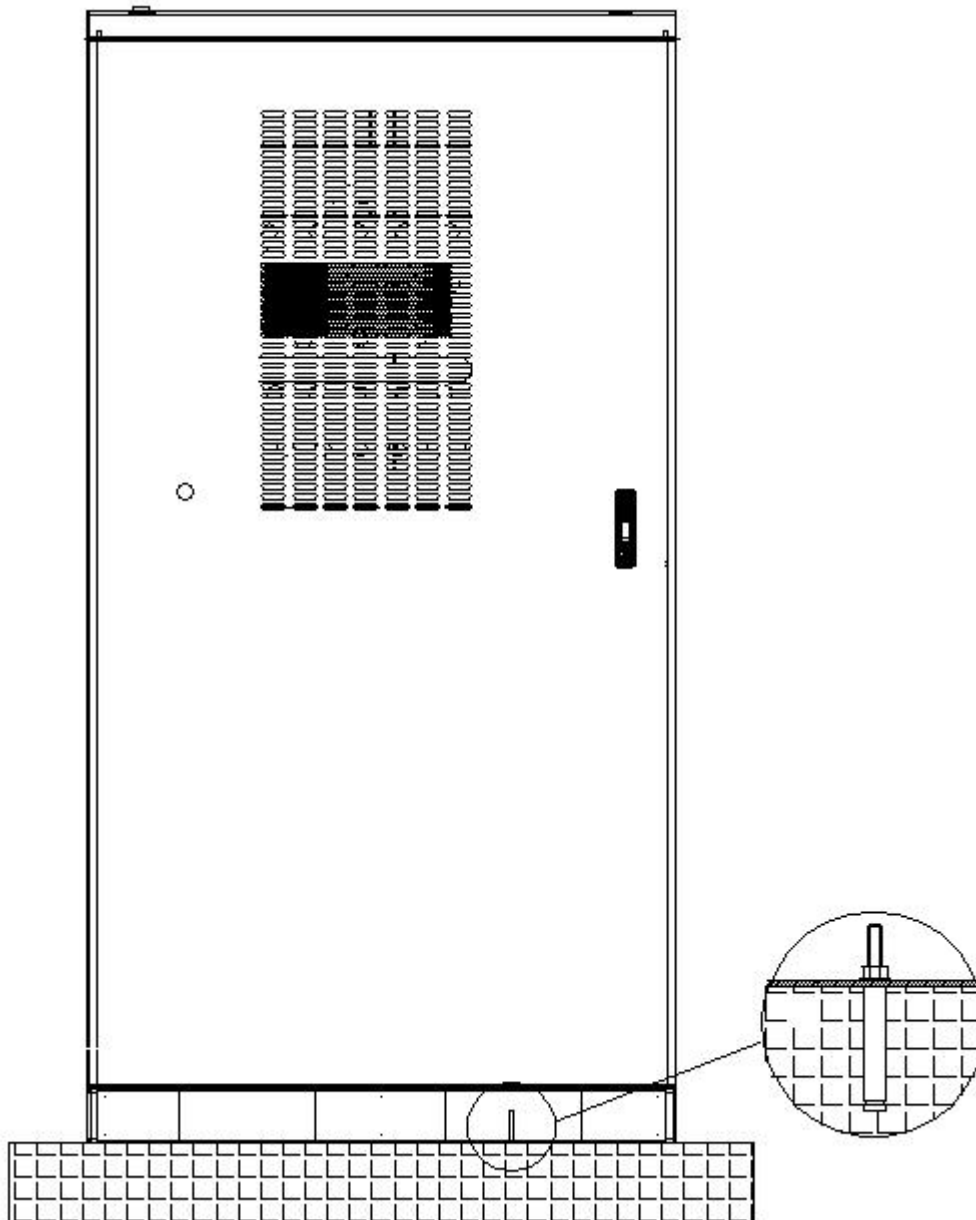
Schematic diagram of cabinet fixing bolt installation
